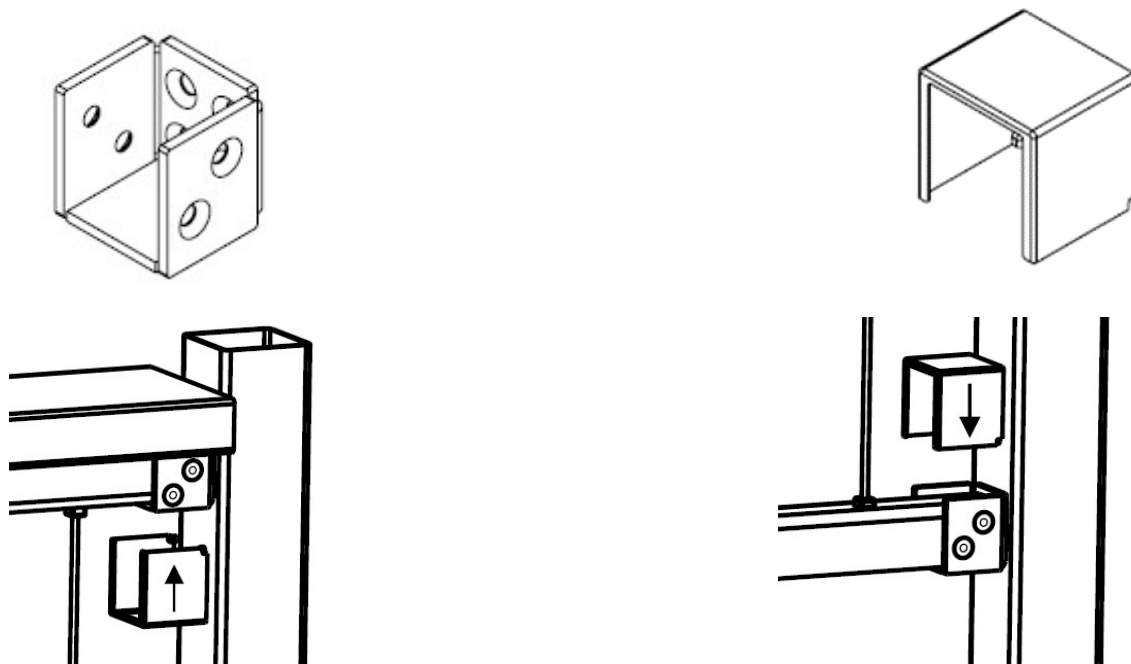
UNIVERSAL RAIL BRACKET AND ASSEMBLY
